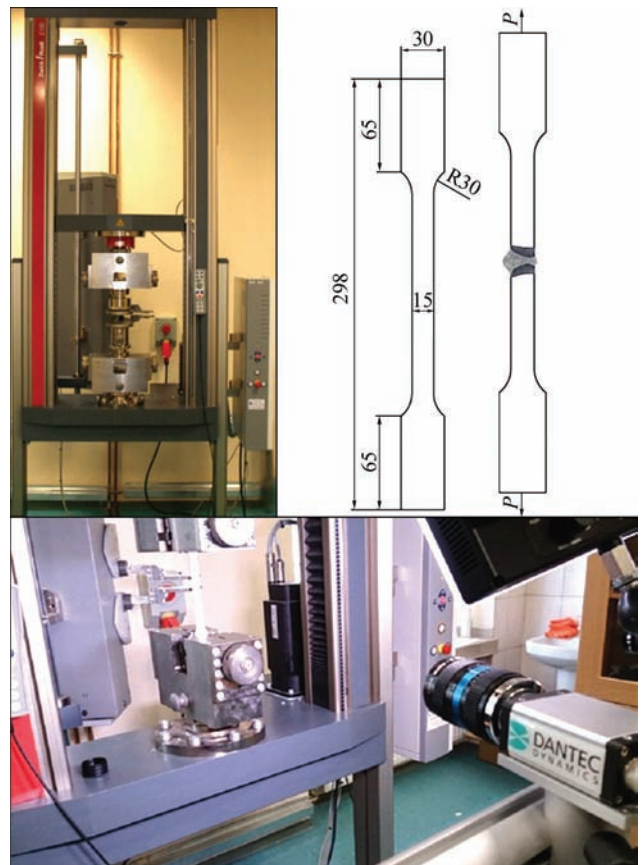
Tension test: universal strength machine Zwick&Roel Z100, dimension of samples used in the test, Q-400 ISTR multi-camera 3D
